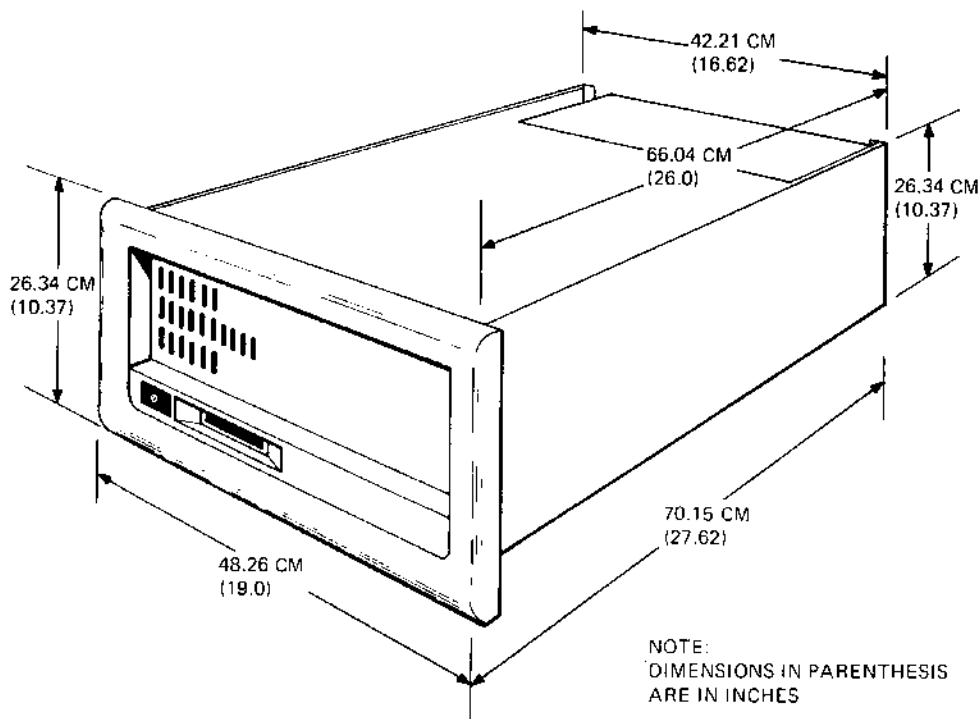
shows the overall dimensions of the PDP-11/44 unit. The unit will occupy a 26.7 cm (10-1/2 inch) vertical space within a rack or cabinet.
